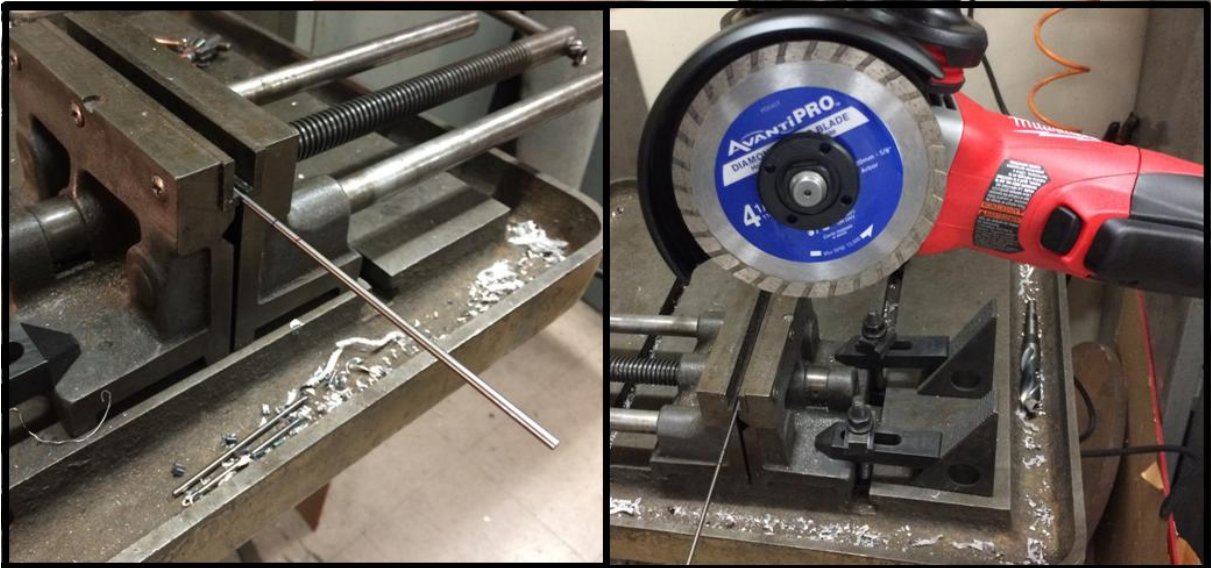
Rod sizing process. (Left) rod in vice. (Right) diamond tipped angle grinder.
